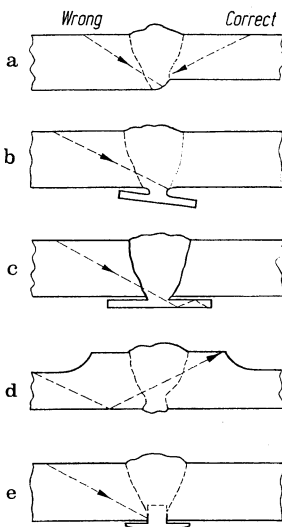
Interfering echoes in the testing of welds. a Displaced plates or different thicknesses; b and c backing strip or fitting ring (circumferential welds on pipes); d welded swaged collar; e inserted and incompletely fused fitting ring (to be judged as a genuine flaw)
